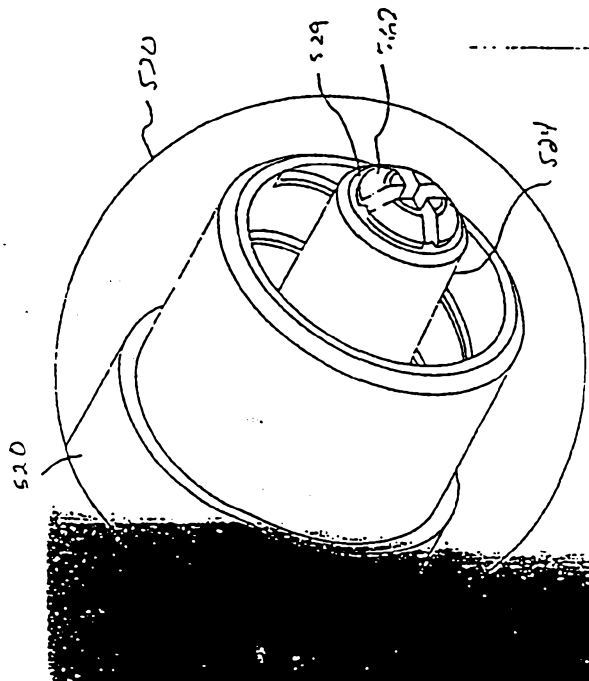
ISO VIEW - PLUNGER IN LOCKED POSITION
